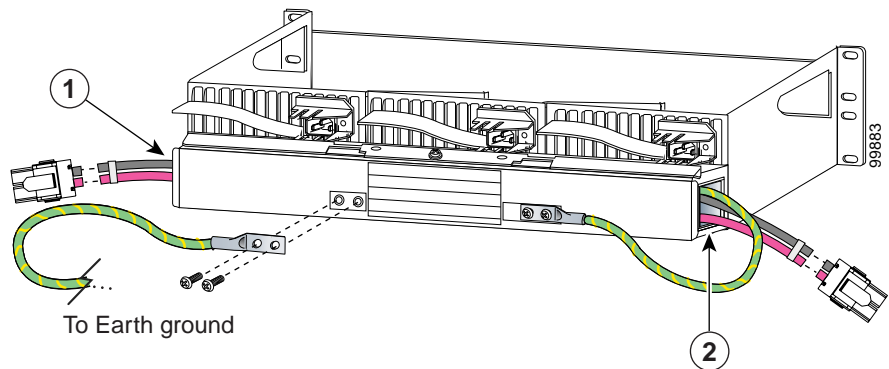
Connecting Cable Wires to the Terminal Blocks
